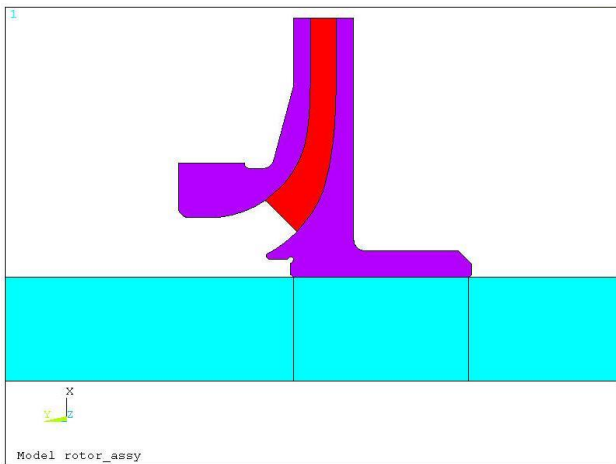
Axi-Symmetric Model of the 11th Stage Impeller and Shaft Assembly
